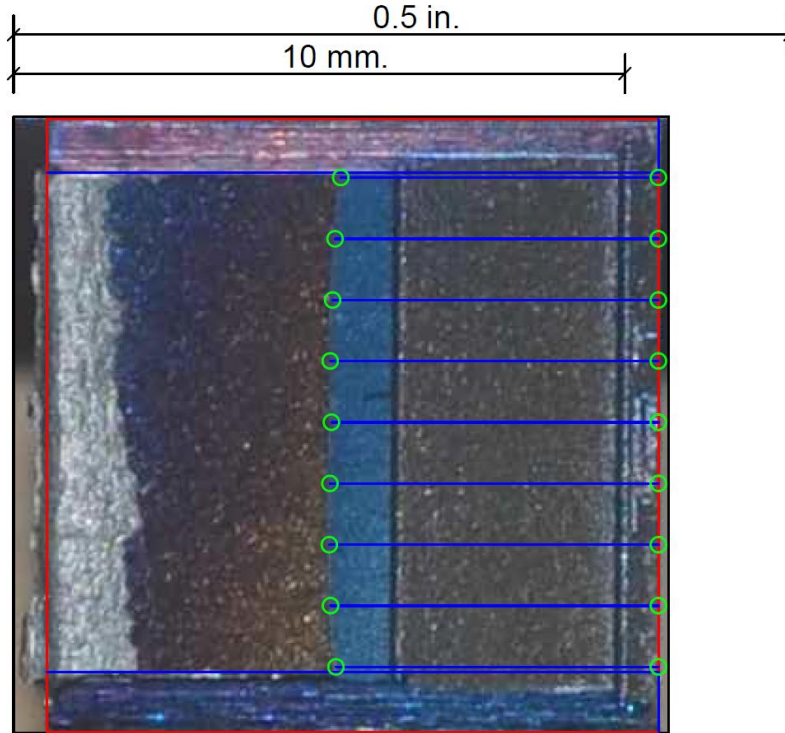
Specimen F9' Fracture Surface
